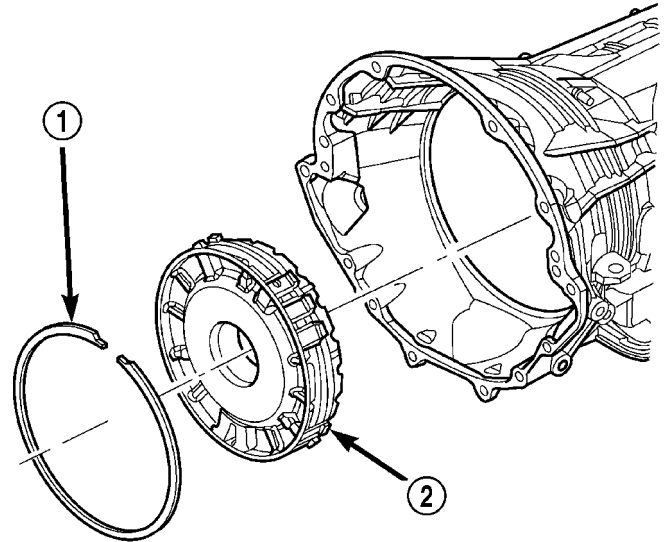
Install 4C Clutch Retainer/Bulkhead
